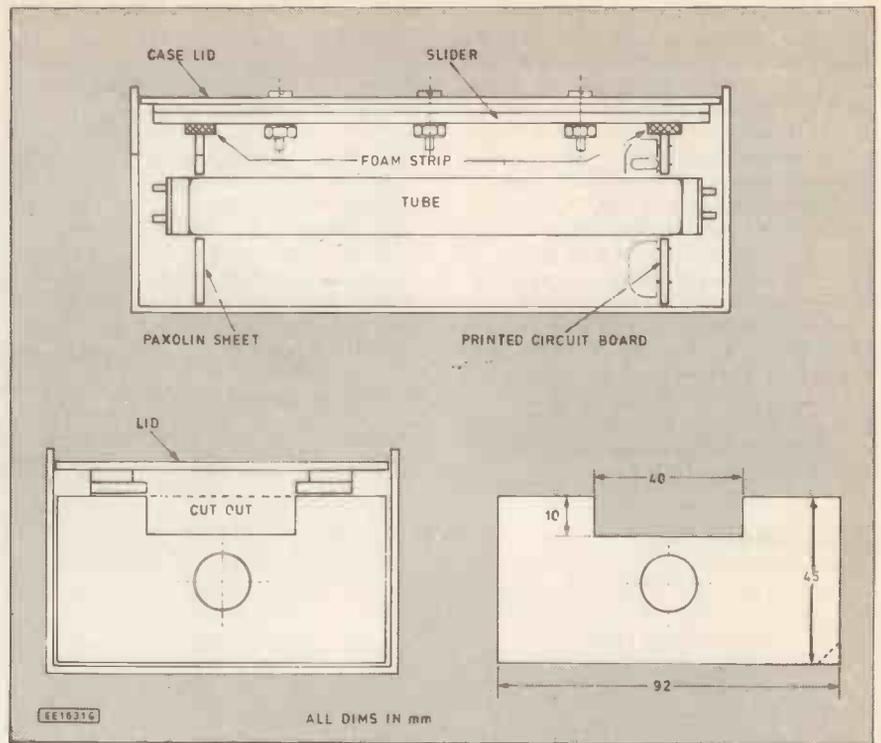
Suggested arrangement for mounting the tube inside the plastic case.
